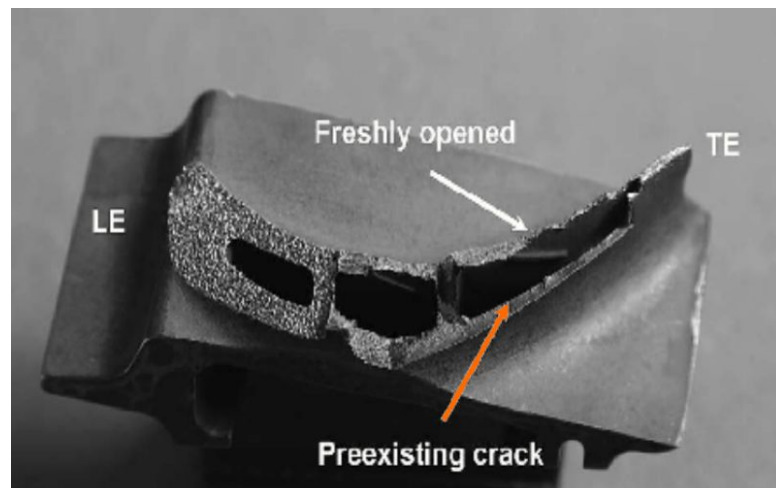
10: Fracture surface of a blade with fatigue failure on the concave side near trailing edge (TE: trailing edge; LE: leading edge) [103].
